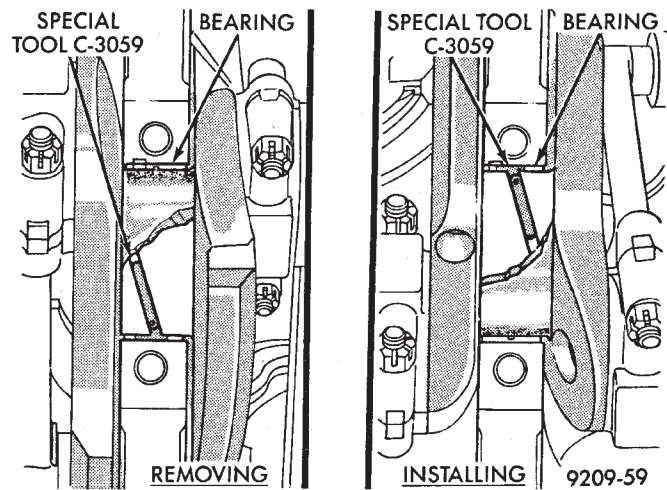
Upper Main Bearing Removal and Installation with Tool C-3059
